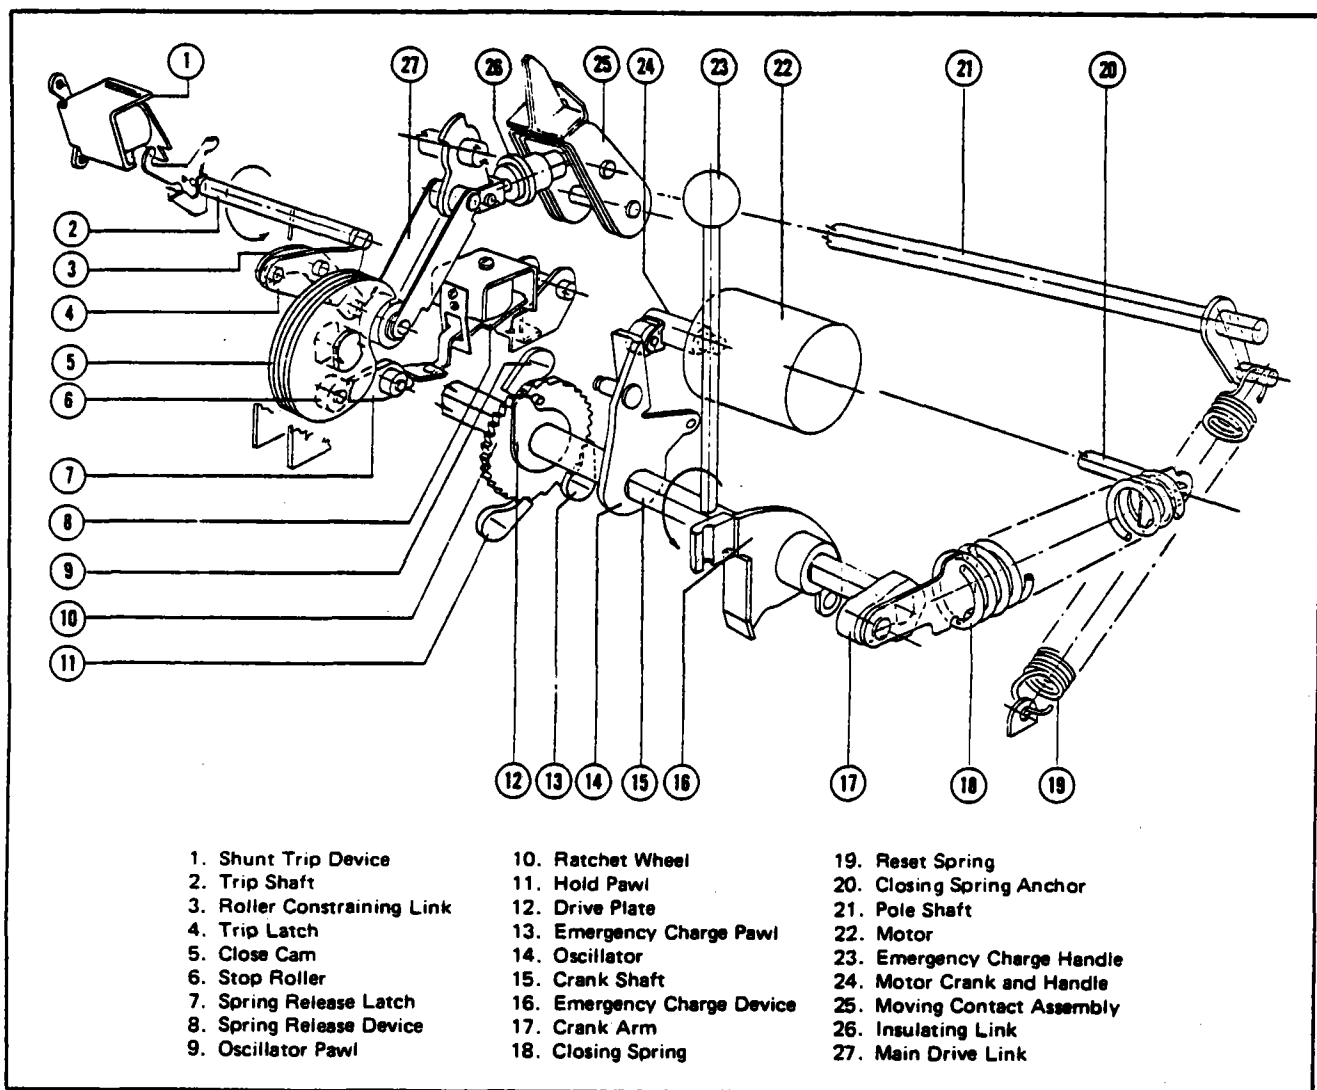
Arrangement of the Principal Parts of a Power Operated Mechanism. The Close Spring is Shown in the Charged Position
